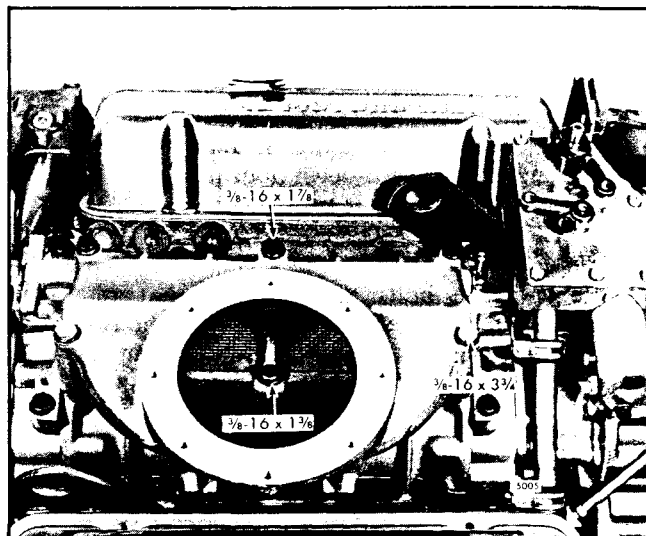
Location of Air Shut-Down Housing Mounting Bolts (6V Engines)
